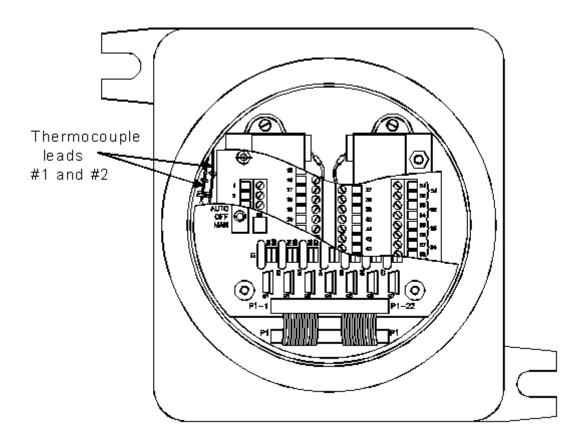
Thermocouple Leads in Lower Explosion-Proof Housing
